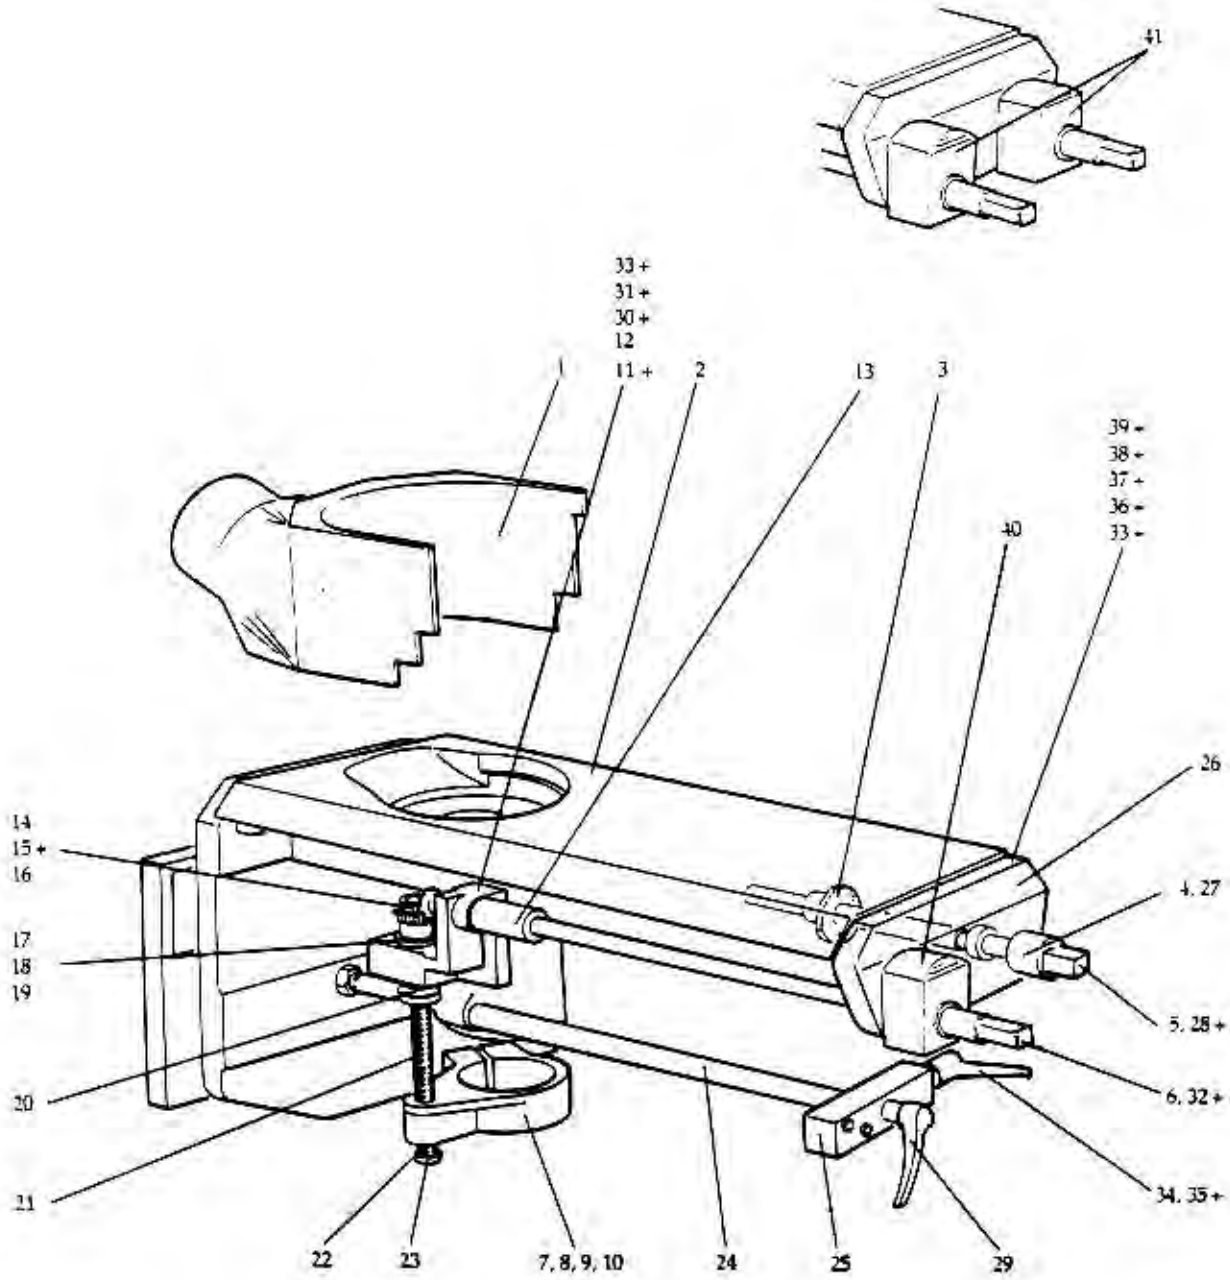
FENCE AND NEAR SIDE HEAD CARRIAGE ADJUSTING MECHANISM
